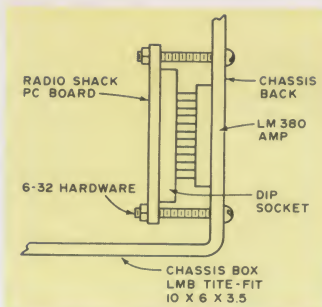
Detail of simple LM 380 amplifier mounting technique for "died in the wool" heat sink fans.
